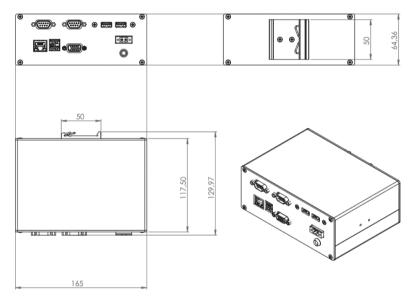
Dimensional drawing thermolMAGER TIM NetPCQ, dimensions in mm, not to scale
